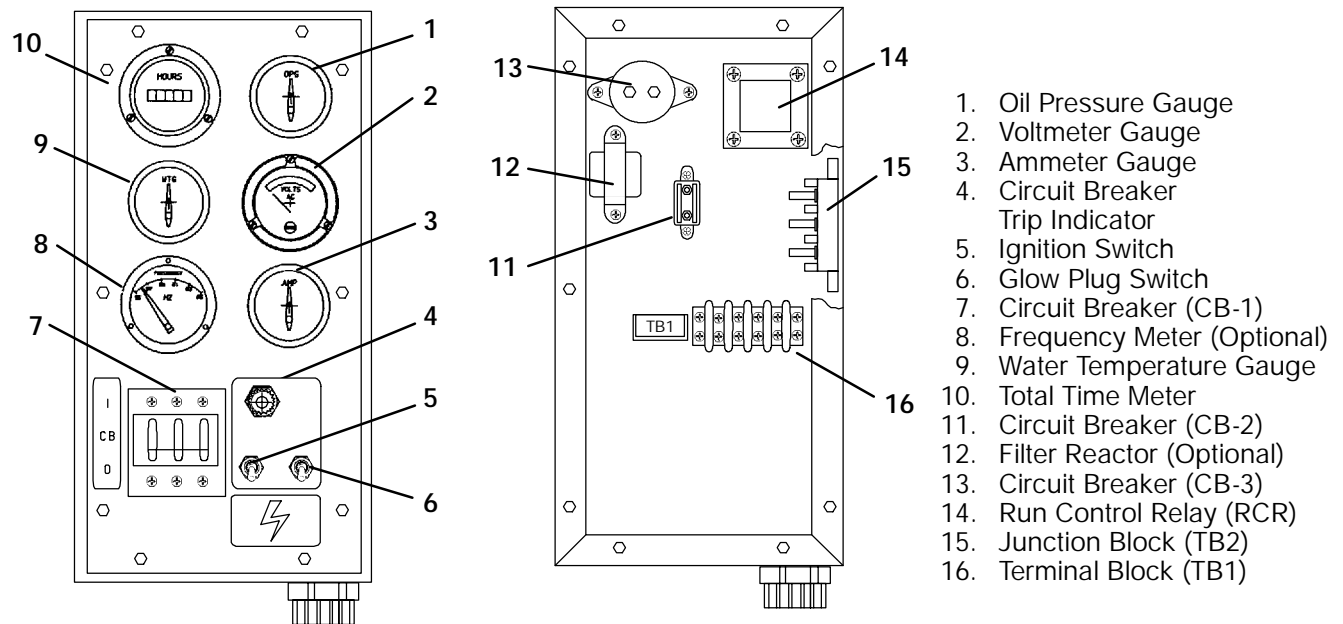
Control Box and Gauge Panel (Models 69GC15-104 & -114)
